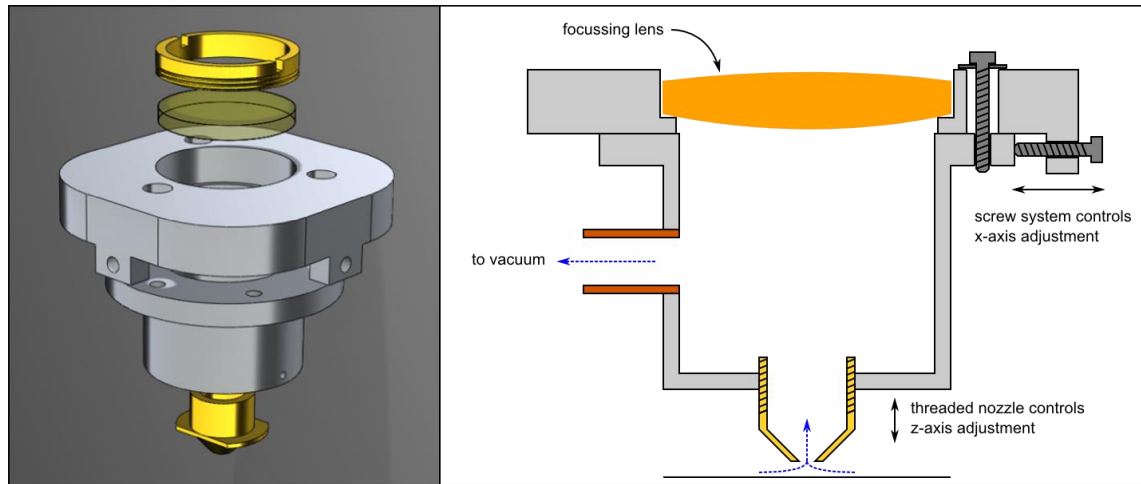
The updated “open” design, an exploded view of the CAD model shown on the left; a cross-section showing x and z adjustment mechanisms shown on the right
